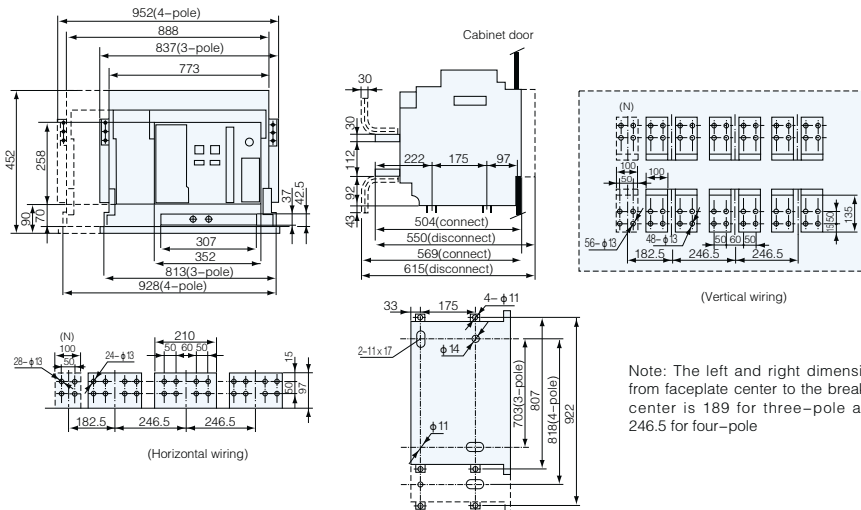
overall and mounting dimensions of drawer type breaker (OW18-6300、6300/4 In=4000、5000)
